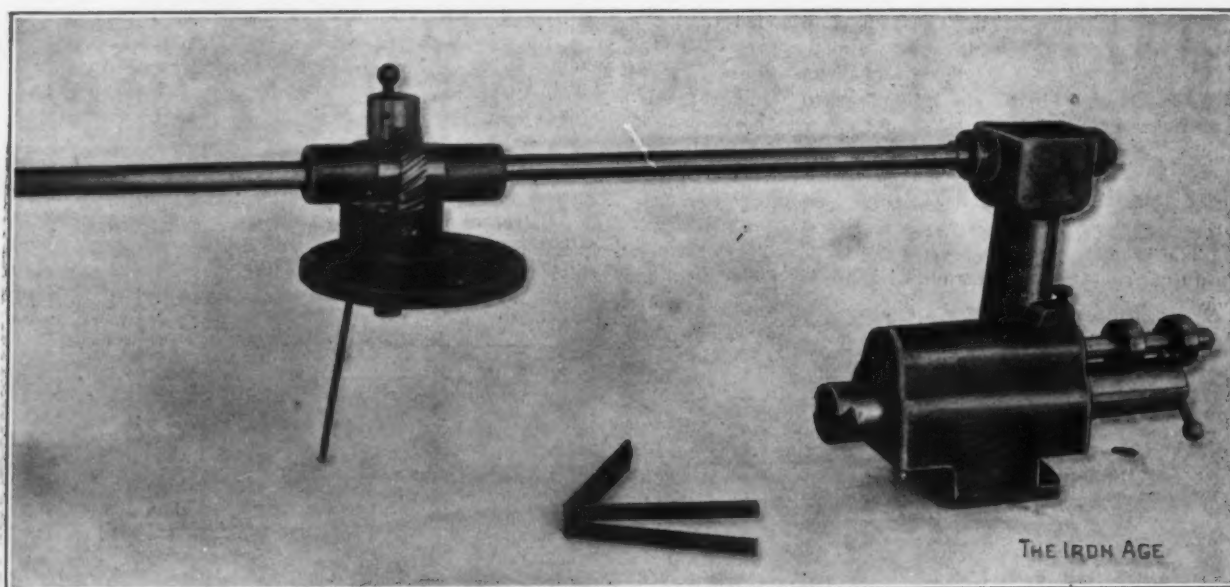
The Parts of the Turret Screw Chasing Attachment by Themselves.
